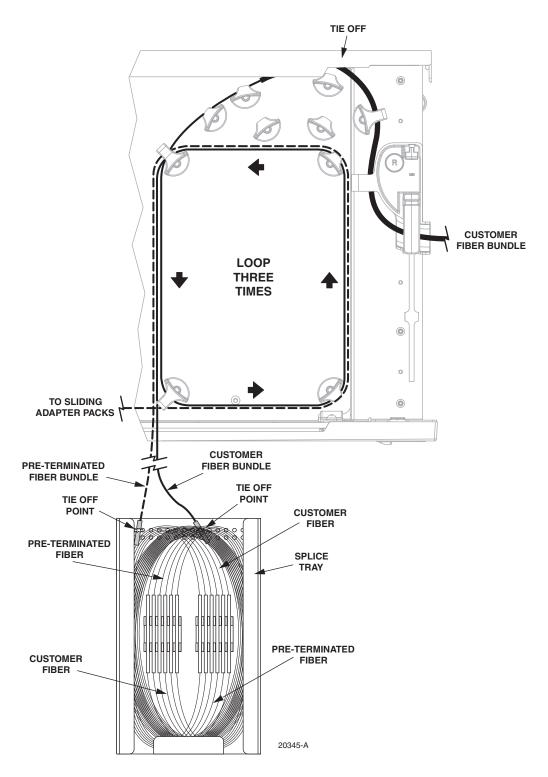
Cable Routing for 12-Position Termination and Splice Tray, Step 3
